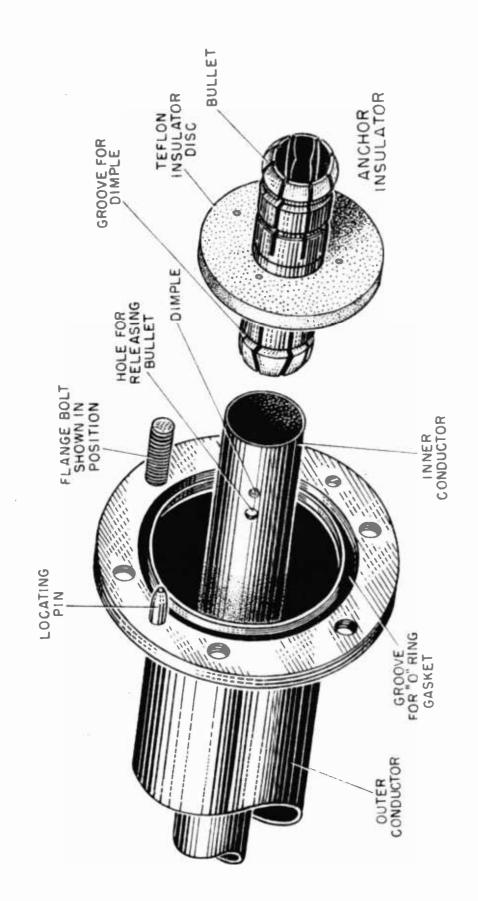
TRANSMISSION LINE MI-19089, UPPER FLANGE ASSEMBLY
